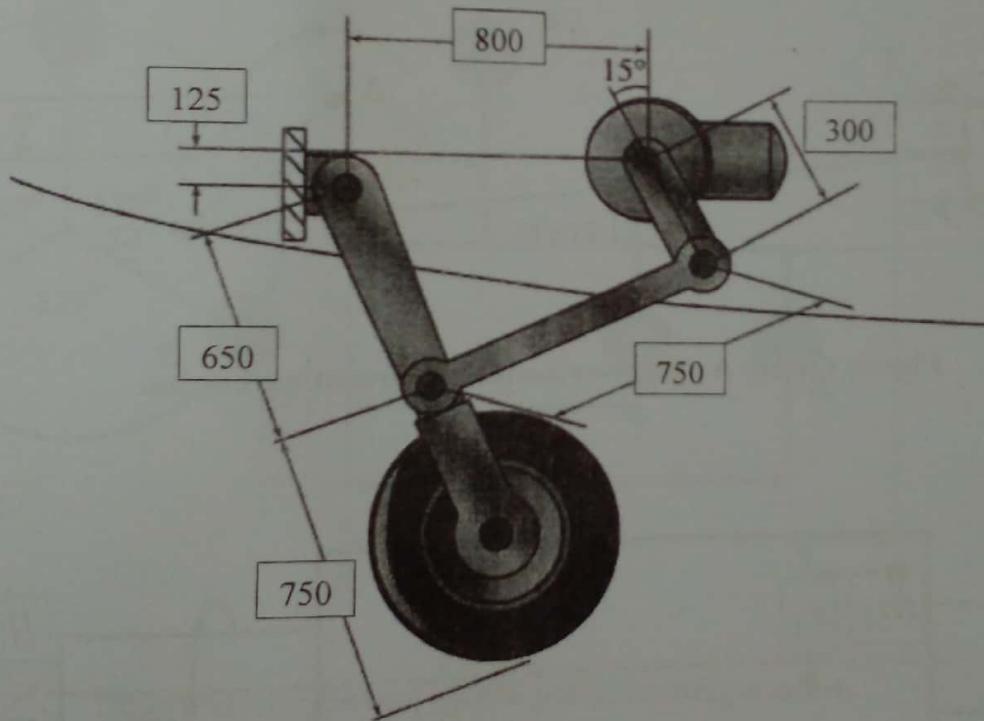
(c): Nosewheel assembly design for a small aircraft (all dimensions are in mm)
